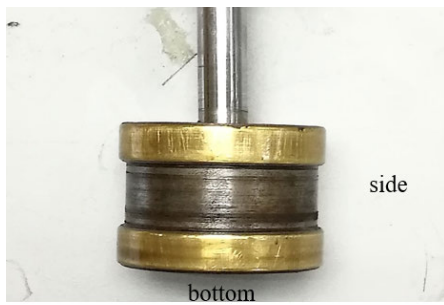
Measurements were taken at two faces, side and bottom of the piston head.
